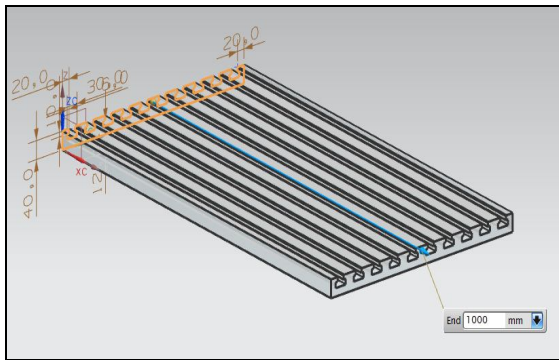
Extrusion feature used to create the 3d model of milling machine bed.
